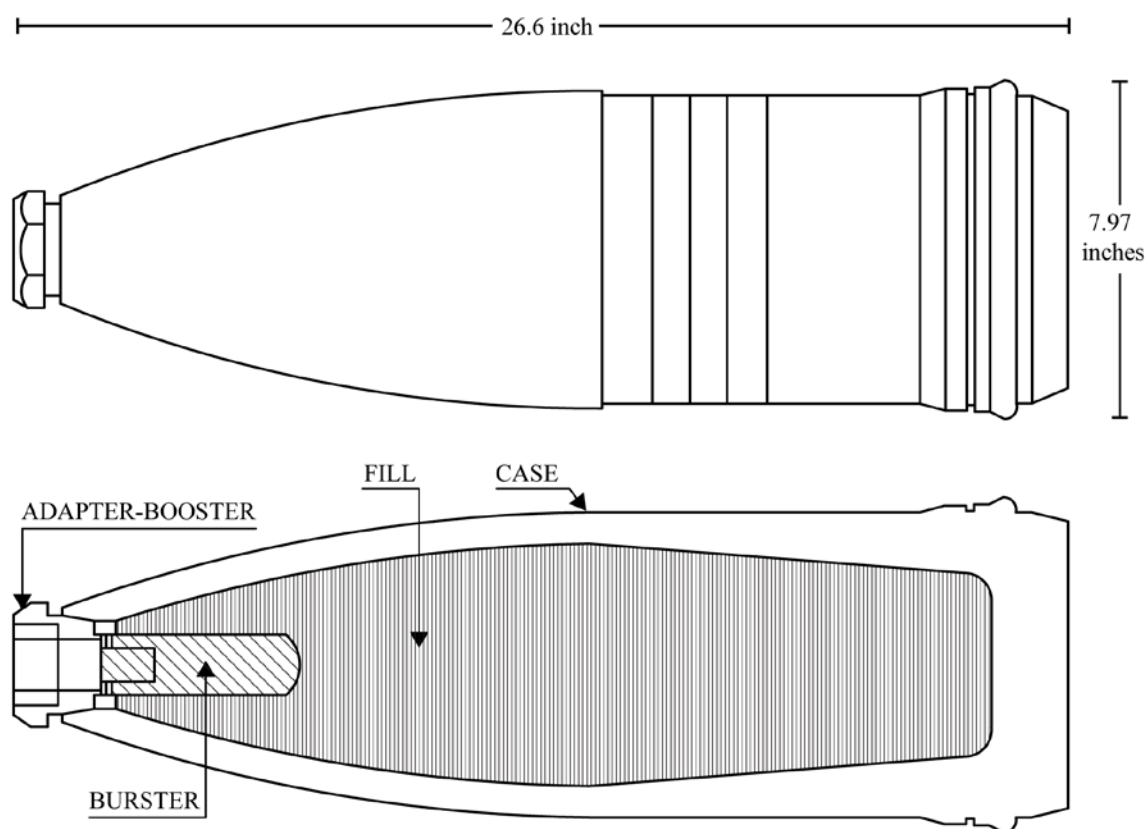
Projectile, 8-inch, Common Steel, Howitzer and Gun, MK III - Line Drawing
